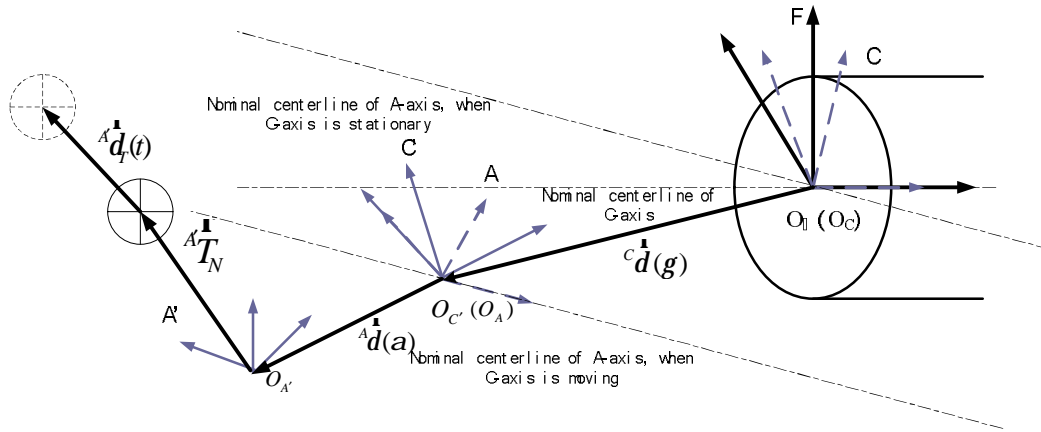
Kinematic error modeling of the universal spindle head of five-axis machine tool
